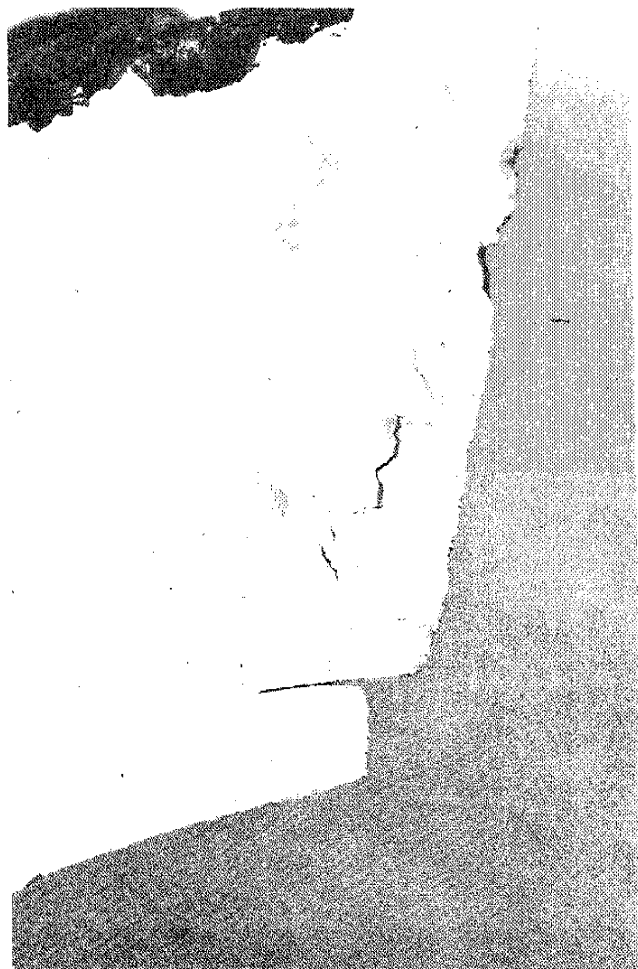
Cross section of nozzle weld into 5-in. dia. by 1/4 +IN. WALL HK-30 stainless steel tube with severe hot fissuring present in 1 1/2-in. nominal dia. cast stainless steel nozzle section. After 2 yr. of service at 1,550°F, an actual failure had not developed in this nozzle section.
